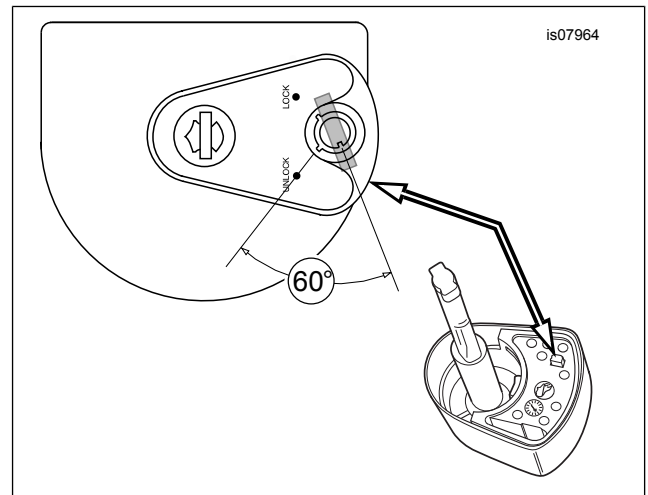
Ignition Switch Knob Release Button (Top and Bottom Views)
